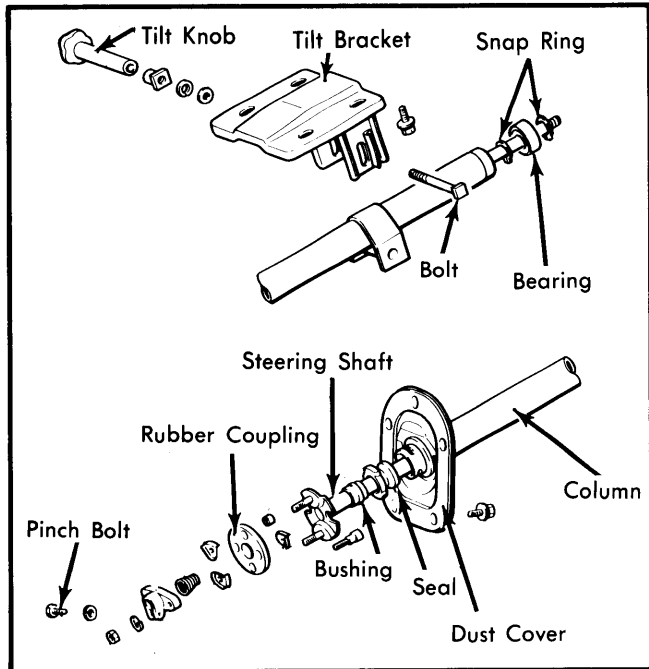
Exploded View of Steering Column D50 & Arrow Pickup
